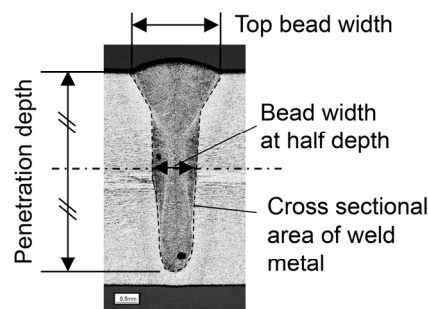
Measurements items of laser weld in this study.
